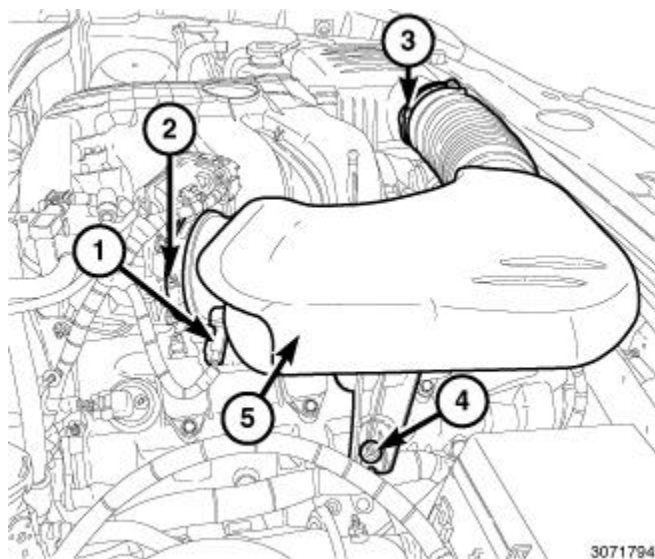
Inlet Air Temperature (IAT) Sensor Electrical Connector, Air Inlet Hose Assembly & Fasteners
